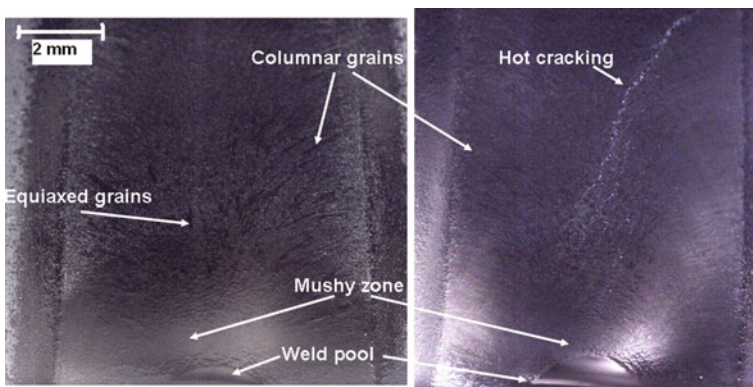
Video image recording during welding showing the back part of the weld pool
